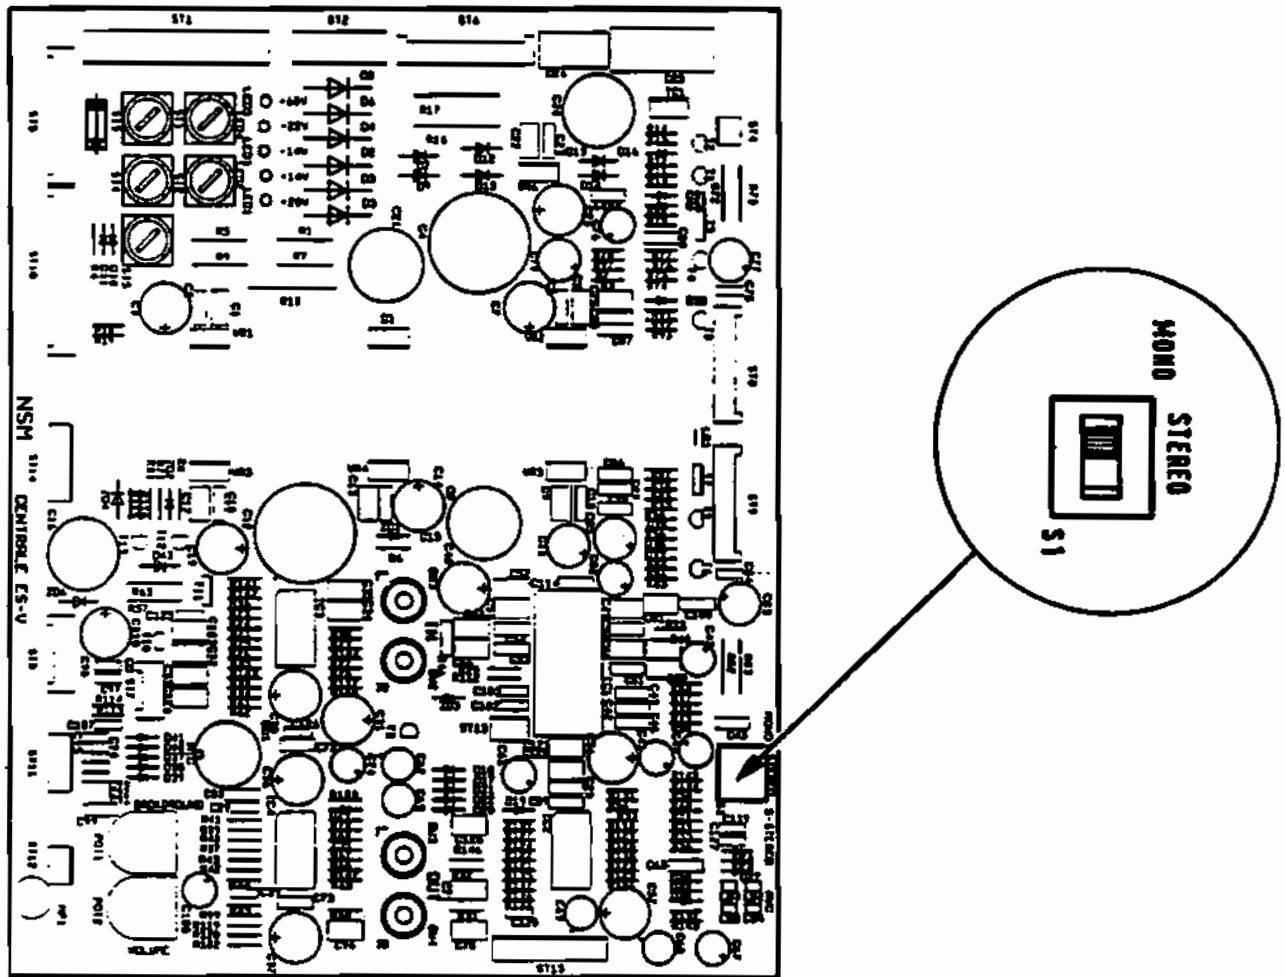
View to the layout of the PCB "Central unit", Mono/Stereo switch
